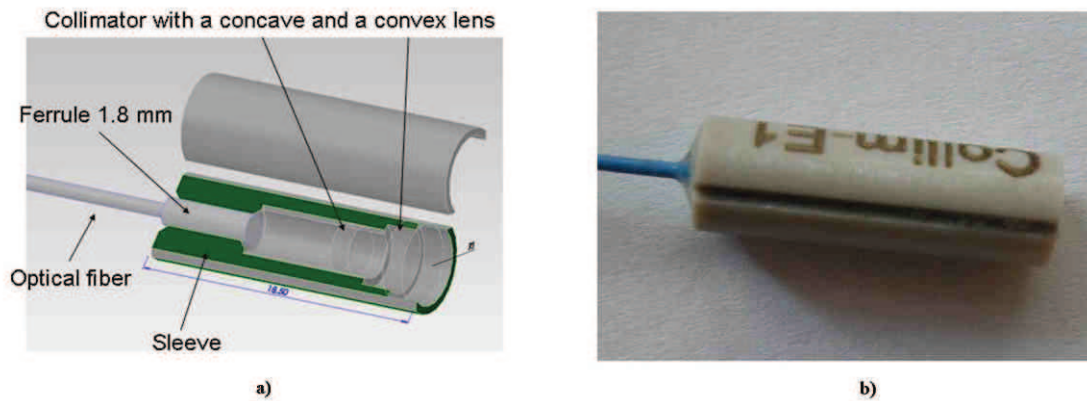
Collimator. a) 3D drawing of the assembly. b) Assembled component.
